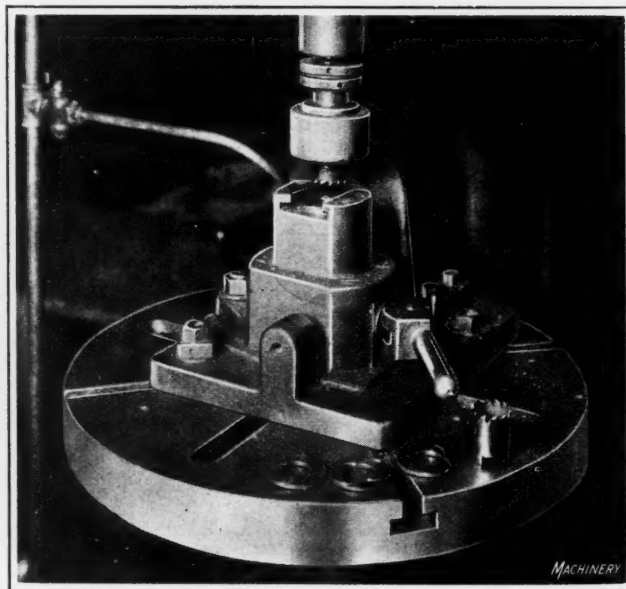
Drilling Machine and Fixture used in cutting Oil-grooves in Bronze Washers
